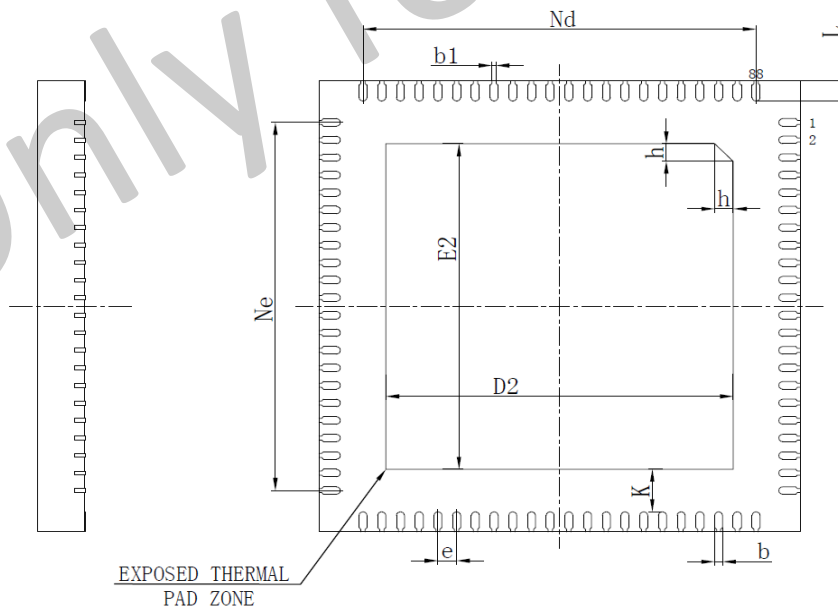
8. 9 mm x 9 mm Package Bottom View
